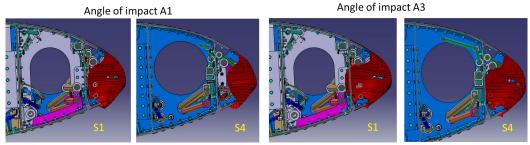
deformed leading edge versus hydraulic and electrical routings
